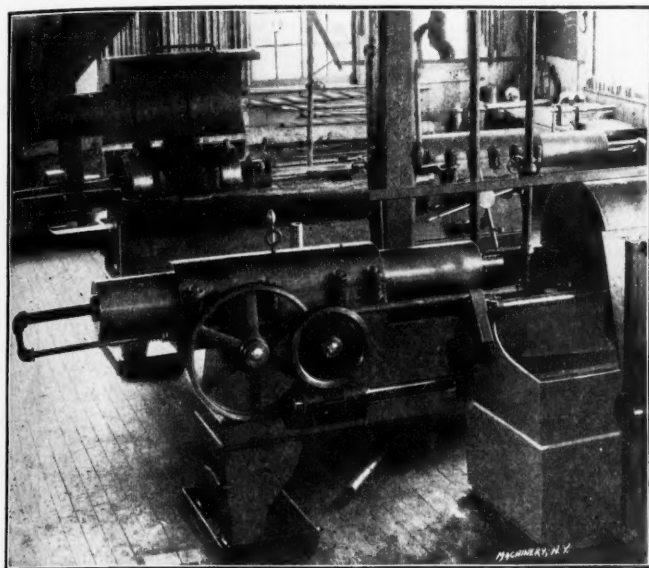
Horizontal Drilling Machine for Drilling Lathe Spindles, etc.
